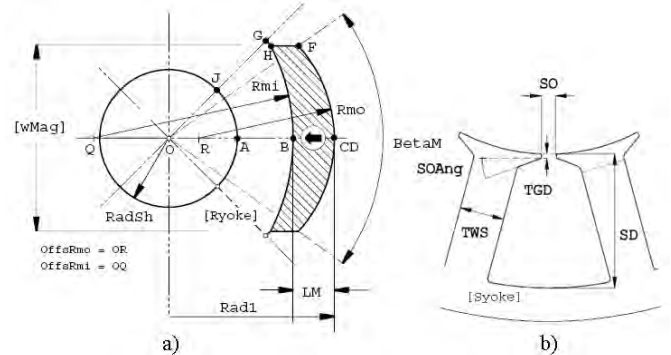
Machine geometry: a) type of rotor BreadLoaf 2; b) slot, [12].
